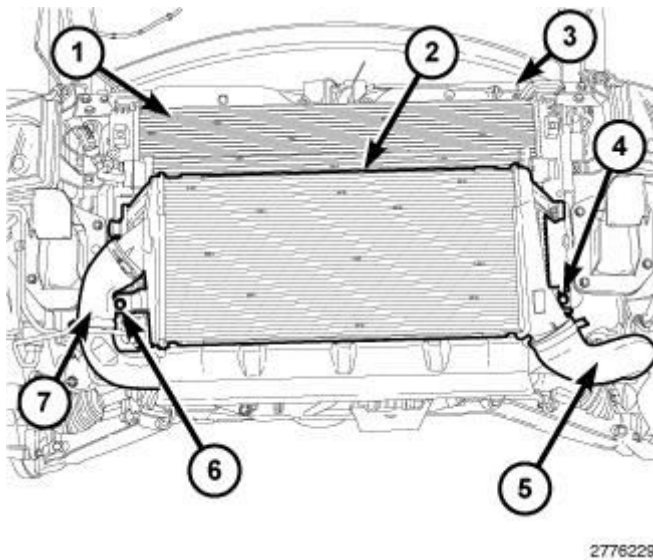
Radiator, Charge Air Cooler, Hose & Fasteners
